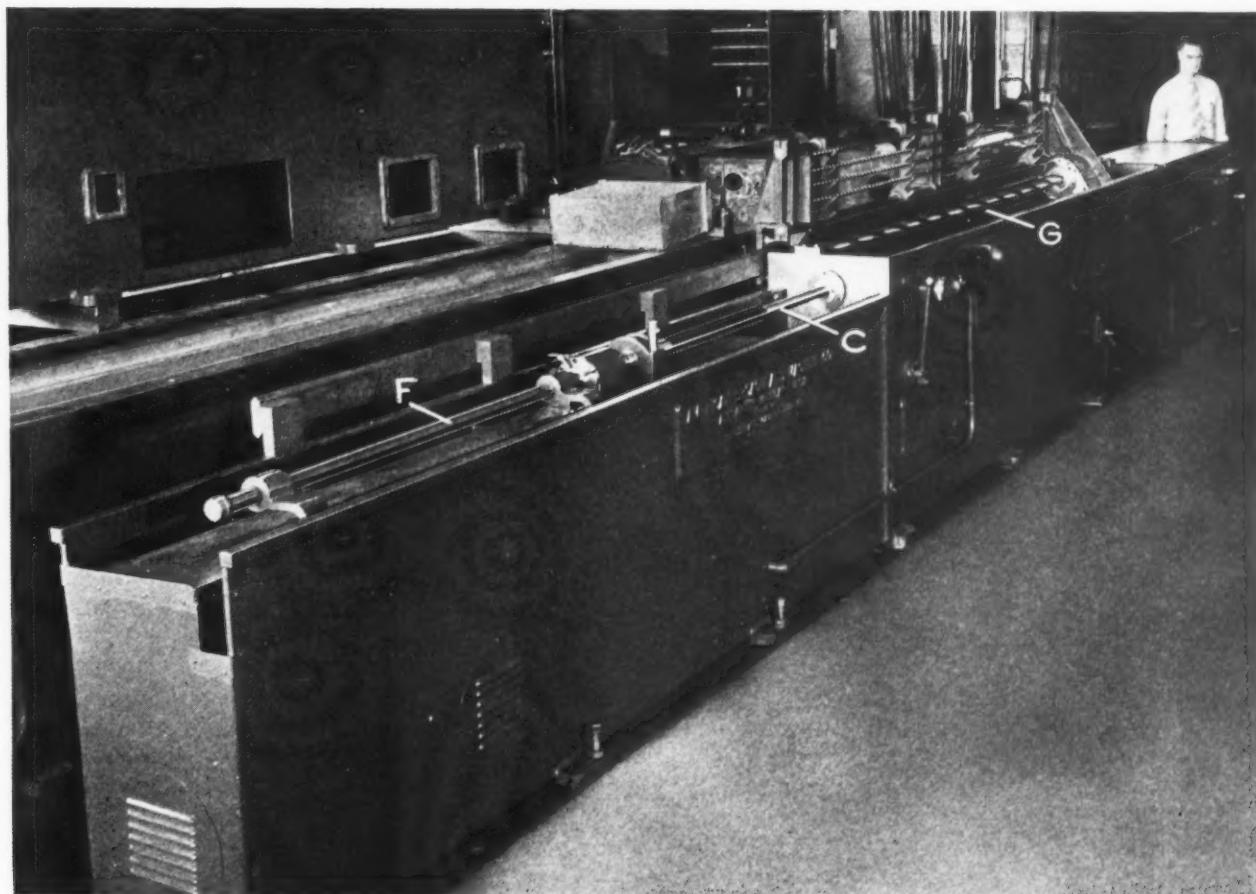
Broaching Machine with Cannon C in Place and Broach at End of Cutting Stroke Ready to be Removed and Placed in Rack for Return to Starting Position
